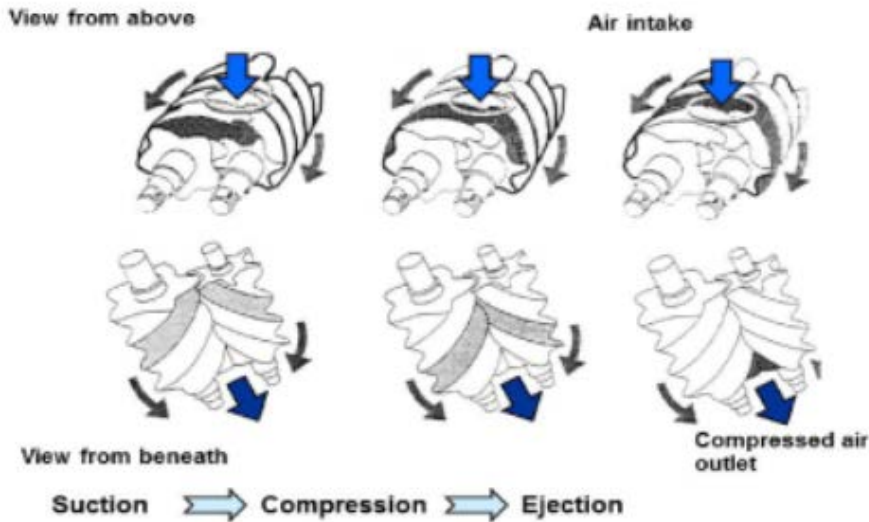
Helical Compressor, also known as a Rotary Screw Compressor
